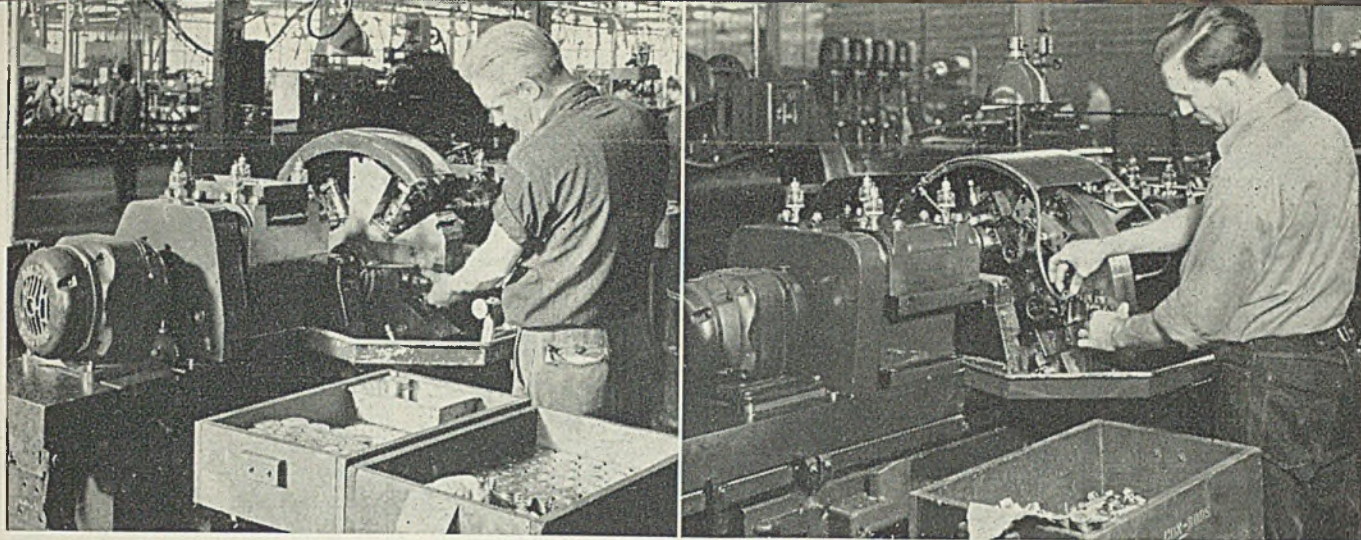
(Left)—Special piston machine for accurately boring and finishing piston-pin holes (both sides) in small aluminum pistons for outboard motors
